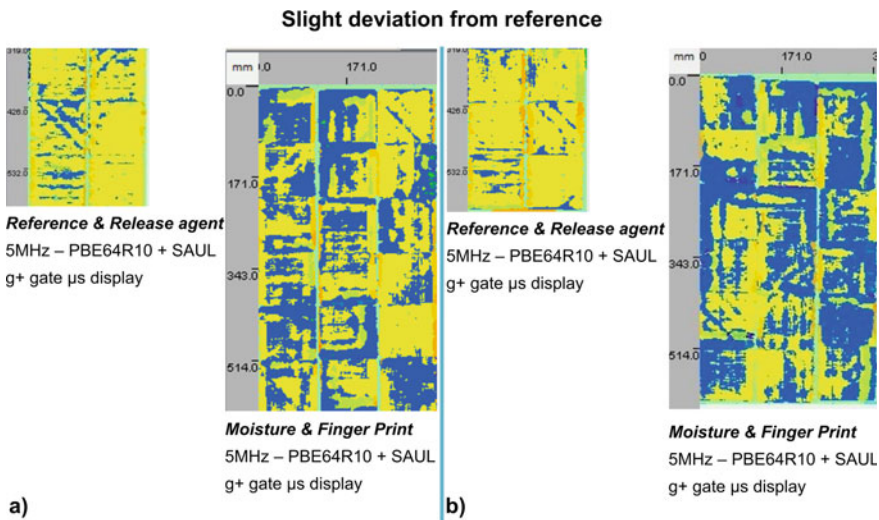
Overview of the minor manufacturing defects observed during the ultrasonic inspection of CFRP specimens, with typical examples of a the bending of samples and b the surface quality problem
